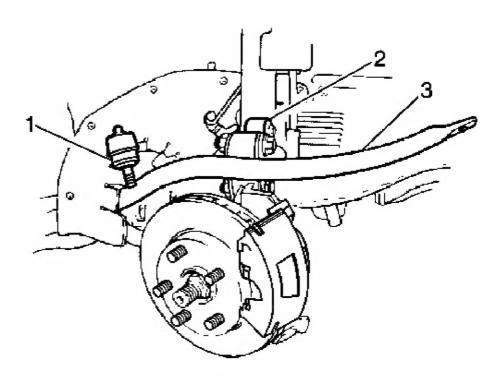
Guiding Stabilizer Shaft In/Out Left Side Of Vehicle Courtesy of GENERAL MOTORS CORP.
